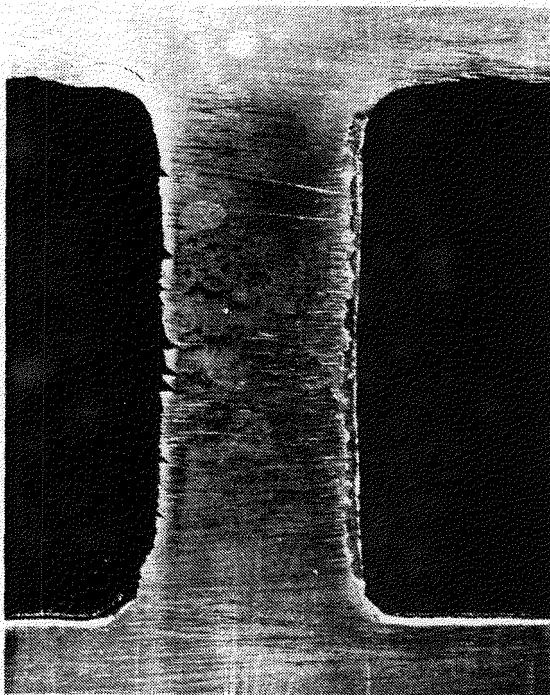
Liner port strut coating condition - 262 hours - power assembly 2.
